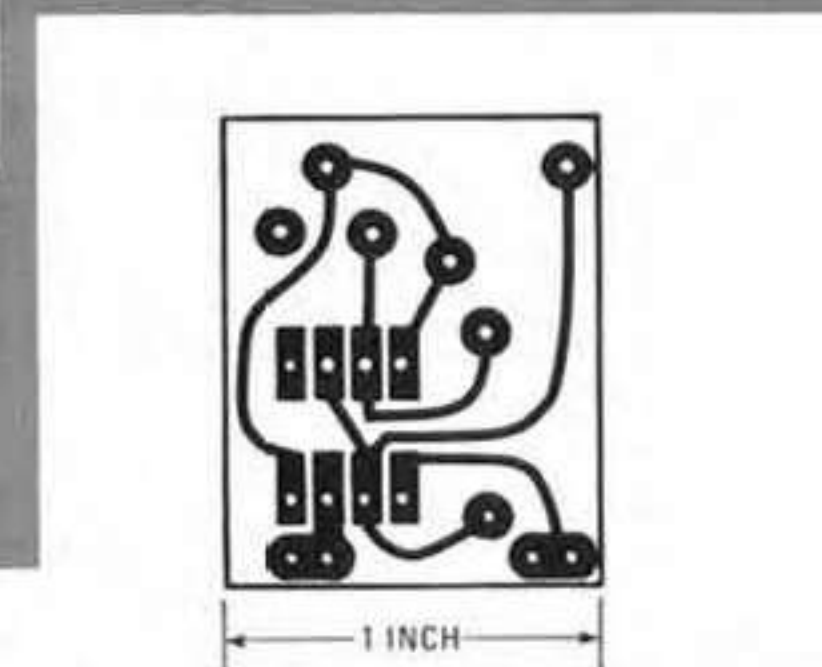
CLOCK-SIGNAL GENERATOR board for stepper motor controller.
